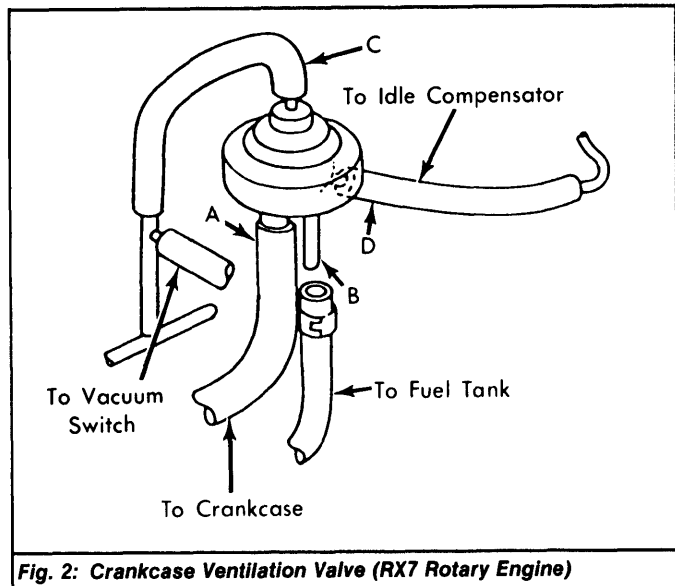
Crankcase Ventilation Valve (RX7 Rotary Engine)
